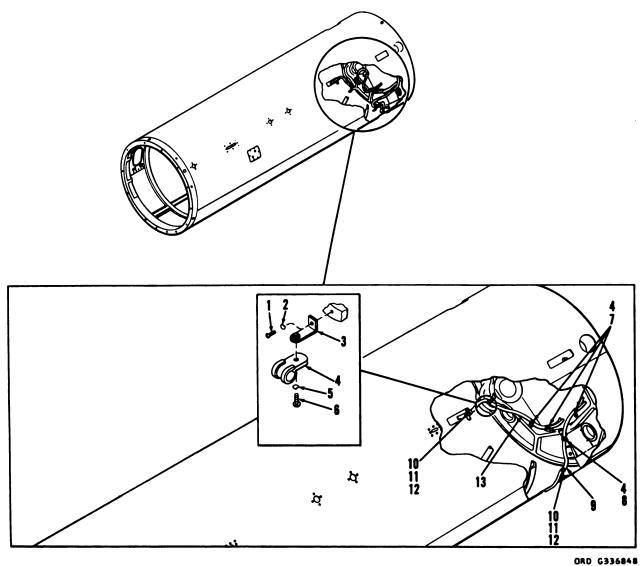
THERMOSTAT, ENGINE HEATER, SPRING MOUNTED /9978713/ /SEE FIGURE 57 FOR NEXT HIGHER ASSEMBLY/
